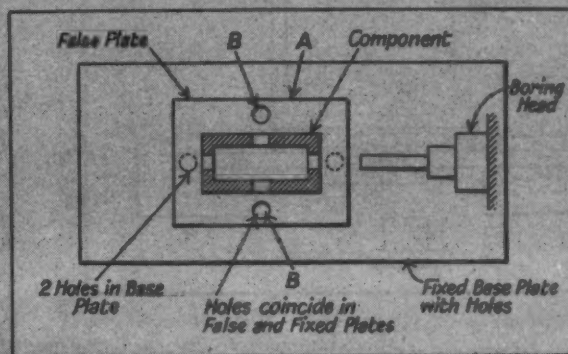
(Right) False Plate Set-up Used in Gear-box Drilling Operations where Axes of Shaft Holes are in One Plane
